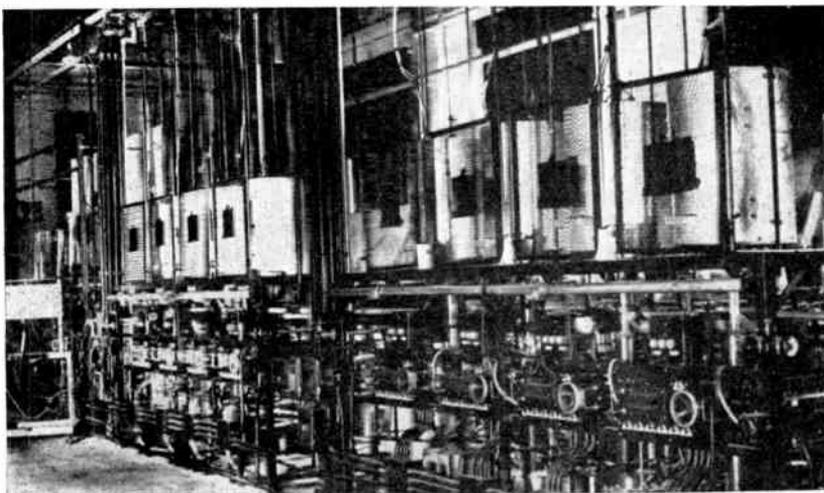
Exhaust benches for H.T. rectifiers showing baking ovens in place.
